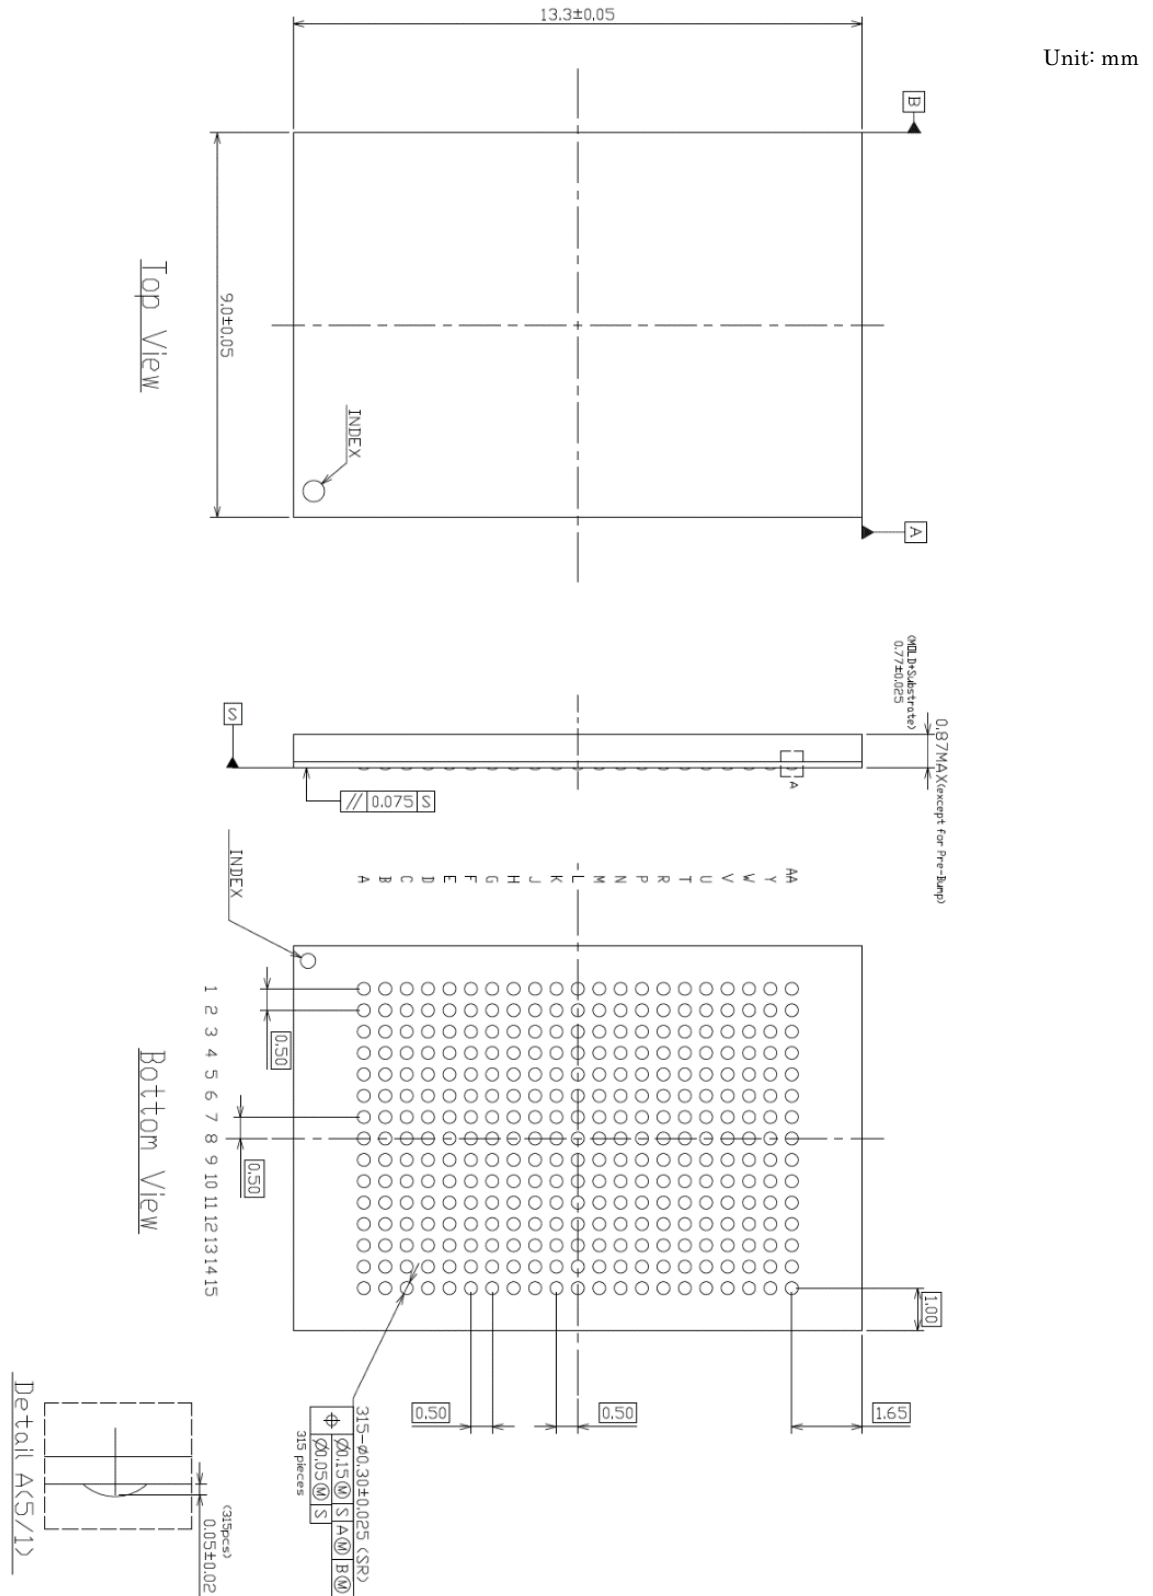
Package Dimension of P-VFLGA315-0914-0.50-002
